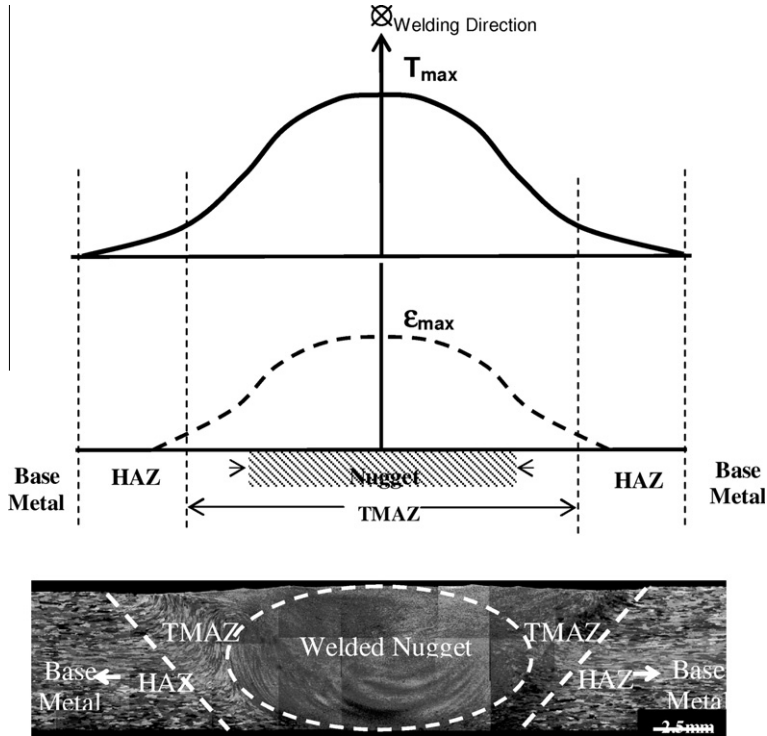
Principle of the friction stir welding process (from Ref. [34]).
